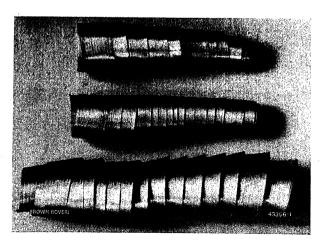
Turnings taken from the welding proper of a welded rotor. The two upper turnings are composed of welding material proper. The lower one is composed, in half, of welded material. The turnings are perfectly homogeneous and of the same elasticity.
